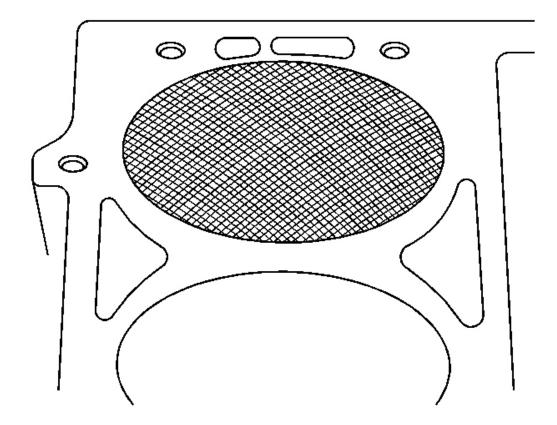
Identifying Cylinder Bore Cross Hatch Pattern Courtesy of GENERAL MOTORS CORP.
